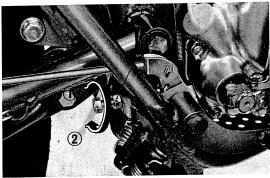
① Raise ② Lower ③ Lock nut ④ Stopper
